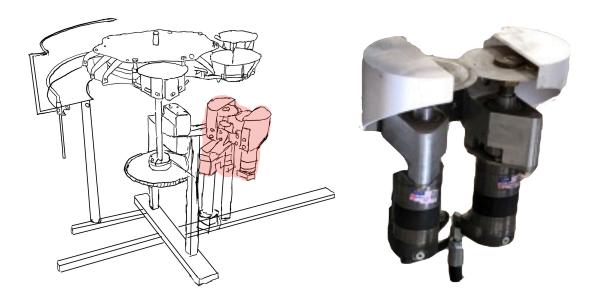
Existing Cutting Blades feature counter-rotating blades spun by hydraulic motors
